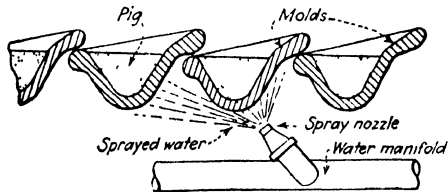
Water-spray cooling mold on pig machine. (Trans. A.I.M.E., col. 120, Crockard)
